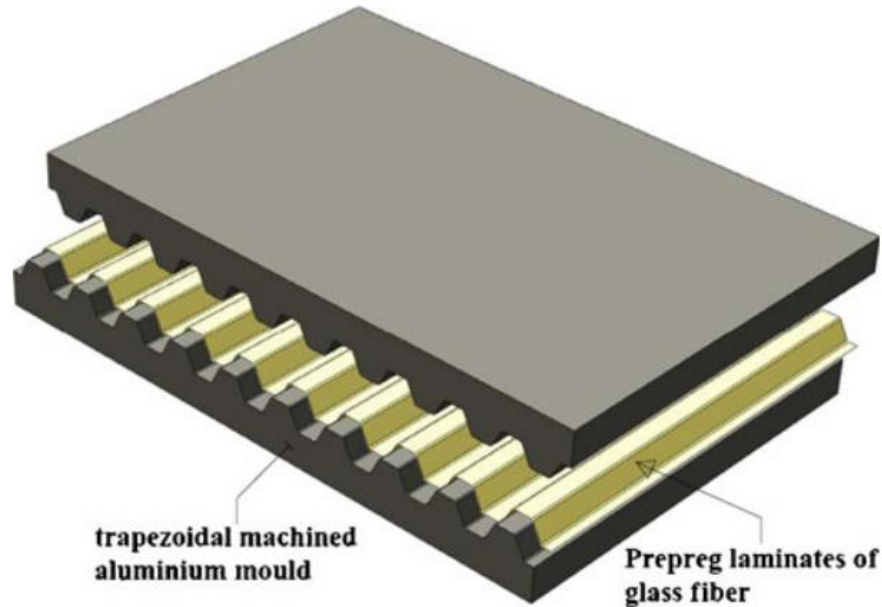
Schematic of trapezoidal machined aluminium mould and prepreg laminates of glass fibre [47]
